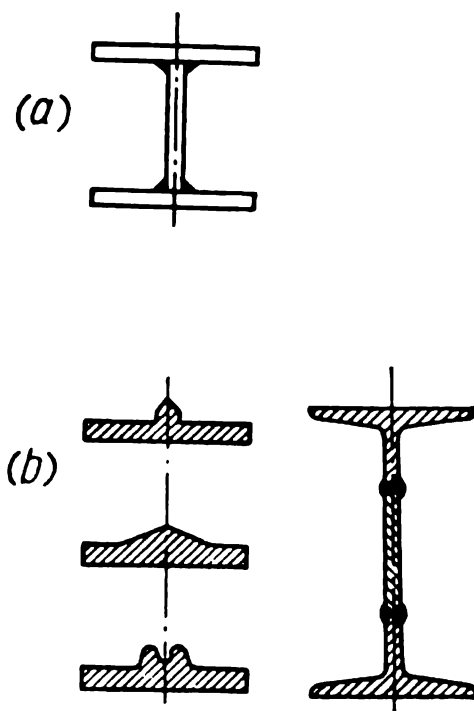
Welded I-beams: (a) welded of flat elements; (b) with a flat web and two specially shaped flange members
